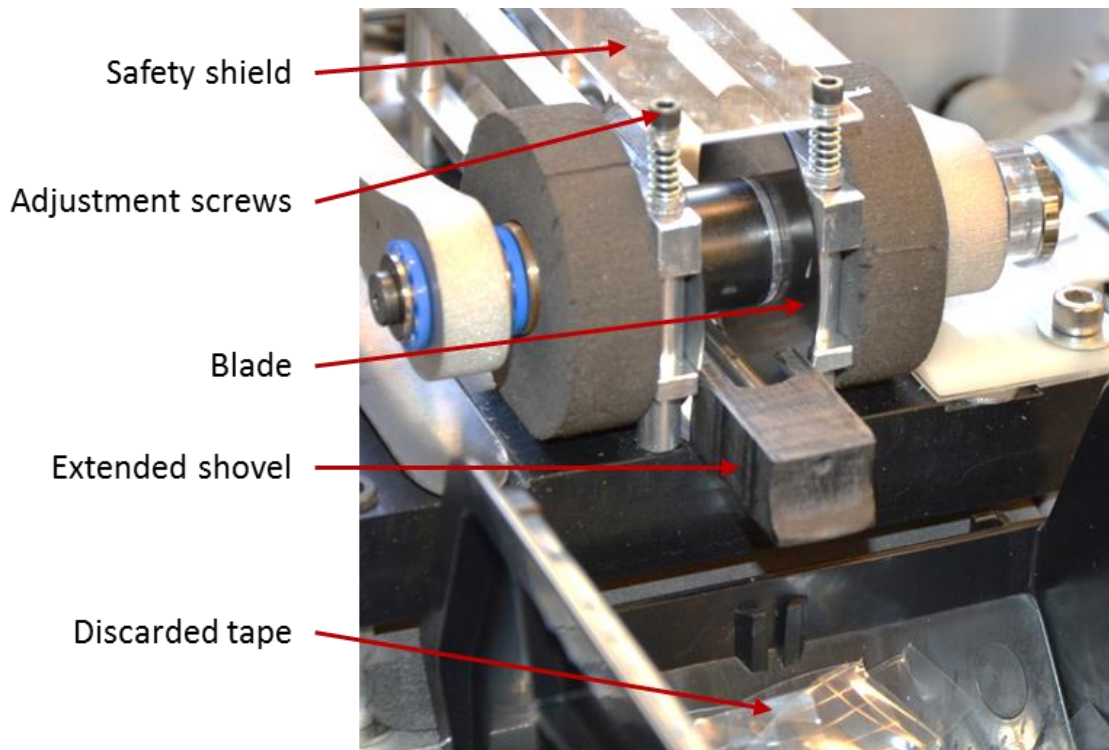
Tape removal. The smaller air cylinder activates and pushes the shovel head forward, ejecting the scrap piece of tape into the waste bin.
